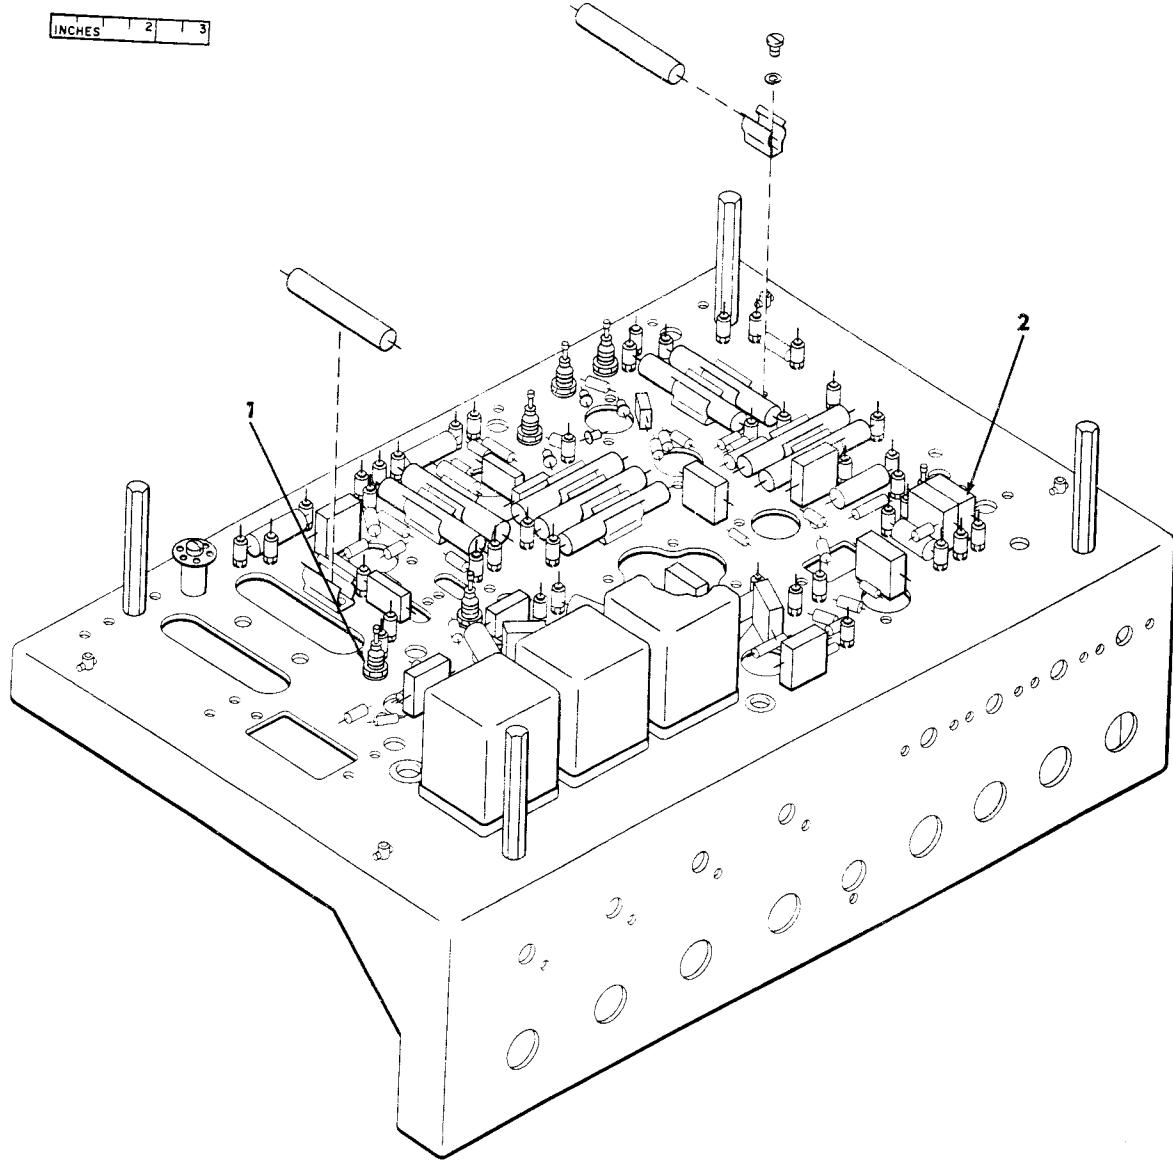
Synchronizer, electrical (9136696)—partial exploded view
